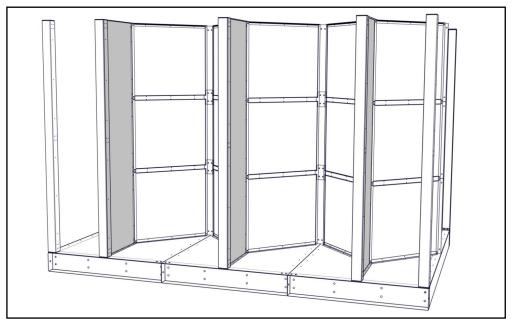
INSTALL INSULATED PLENUM DIVIDERS
